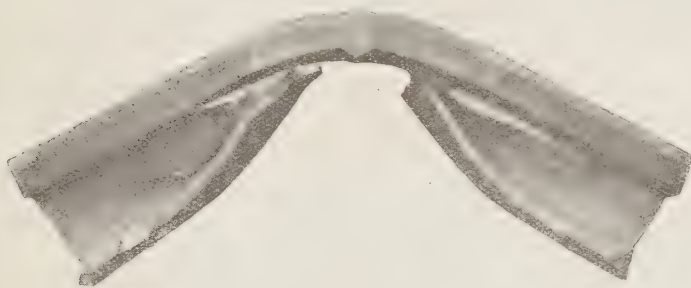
bis. — Electric flash — butt welds on rails not heat-treated. The weld was annealed.
